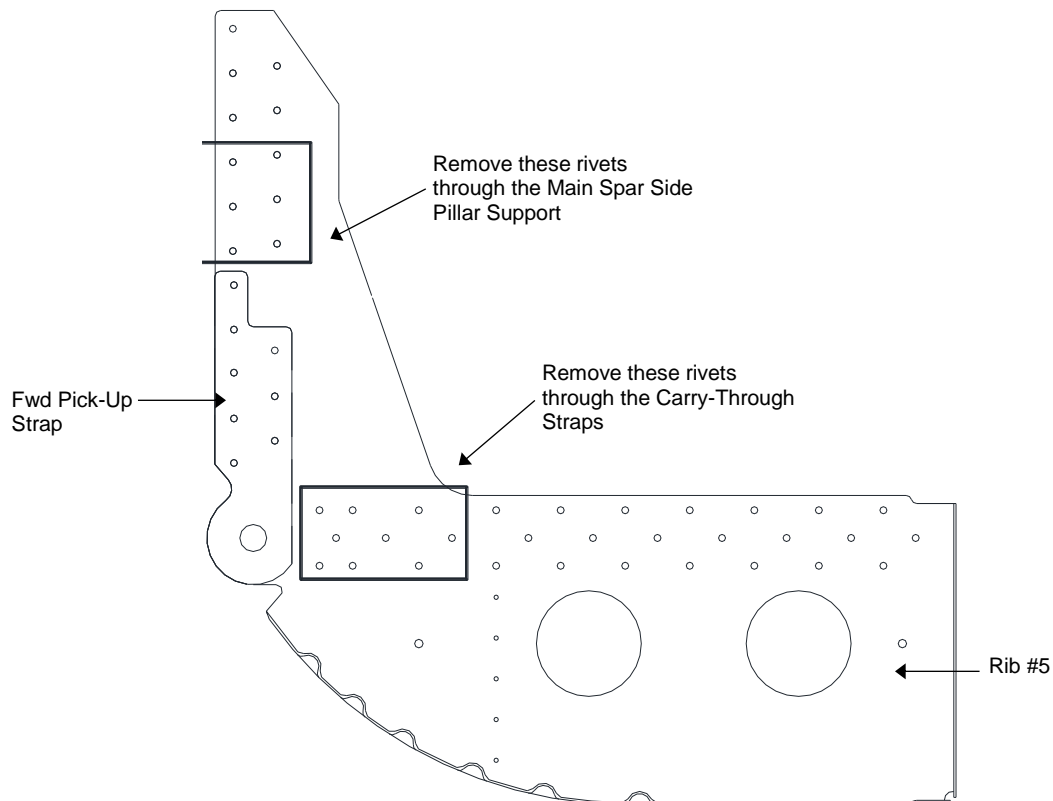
Rivets to be removed. Rib 5 shown, Rib 6 similar.
